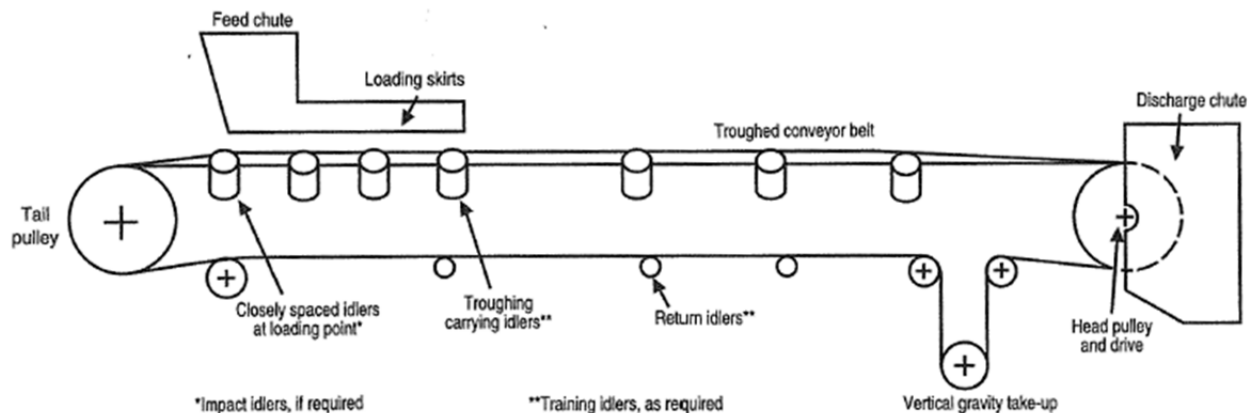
The basic parts of a belt conveyor (CEMA, 1997).
